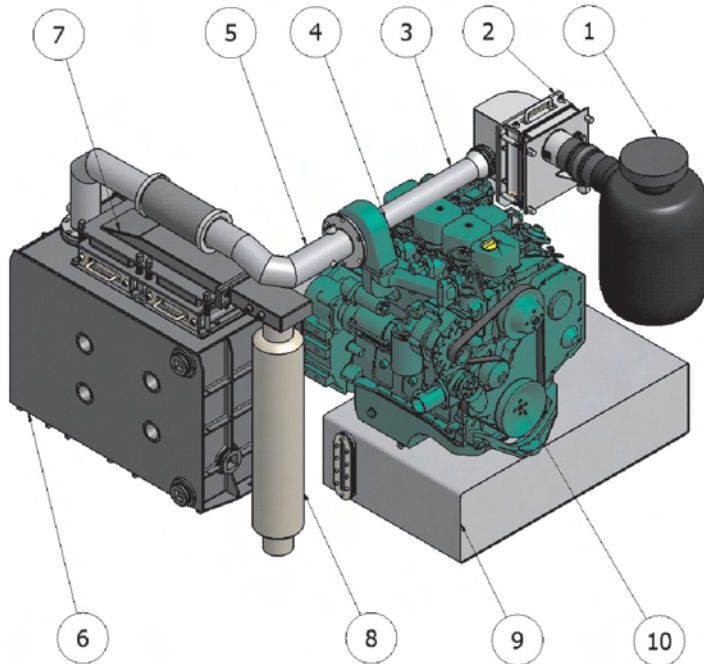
Model of diesel drive developed by KOMAG. 1 – air filter, 2 – flame arrester in inlet system, 3 – inlet hose, 4 – turbocharger, 5 – exhaust gases outlet hose, 6 – water exhaust gases washer, 7 – flame arrester in exhaust system with exhaust manifold, 8 – spark arrester, 9 – fuel tank, 10 – ZS diesel engine
